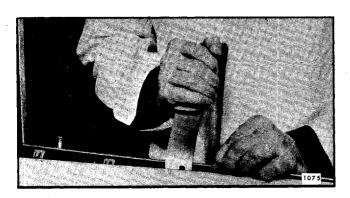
Clip Retained Belt Sealing Strip Removal
